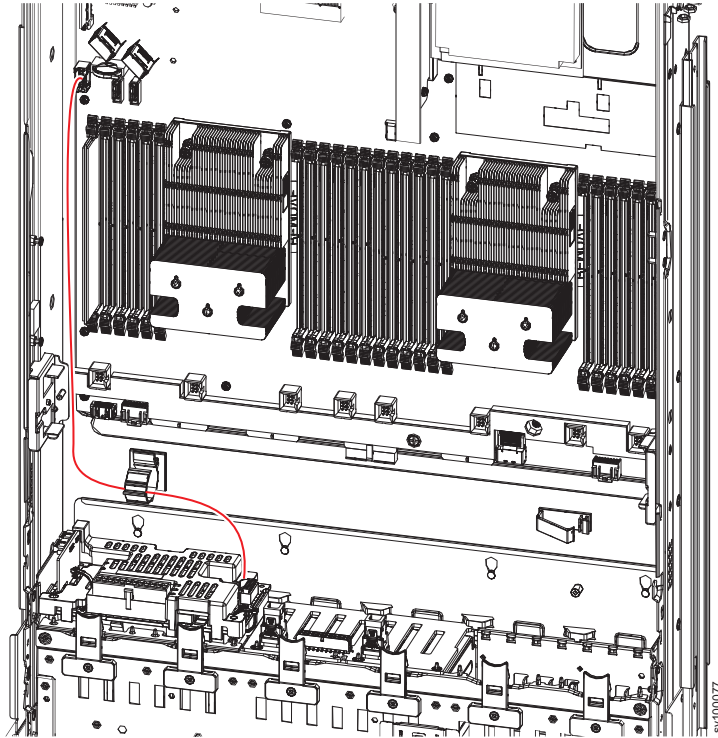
2145-SV1 battery backplane LPC cable and connector
